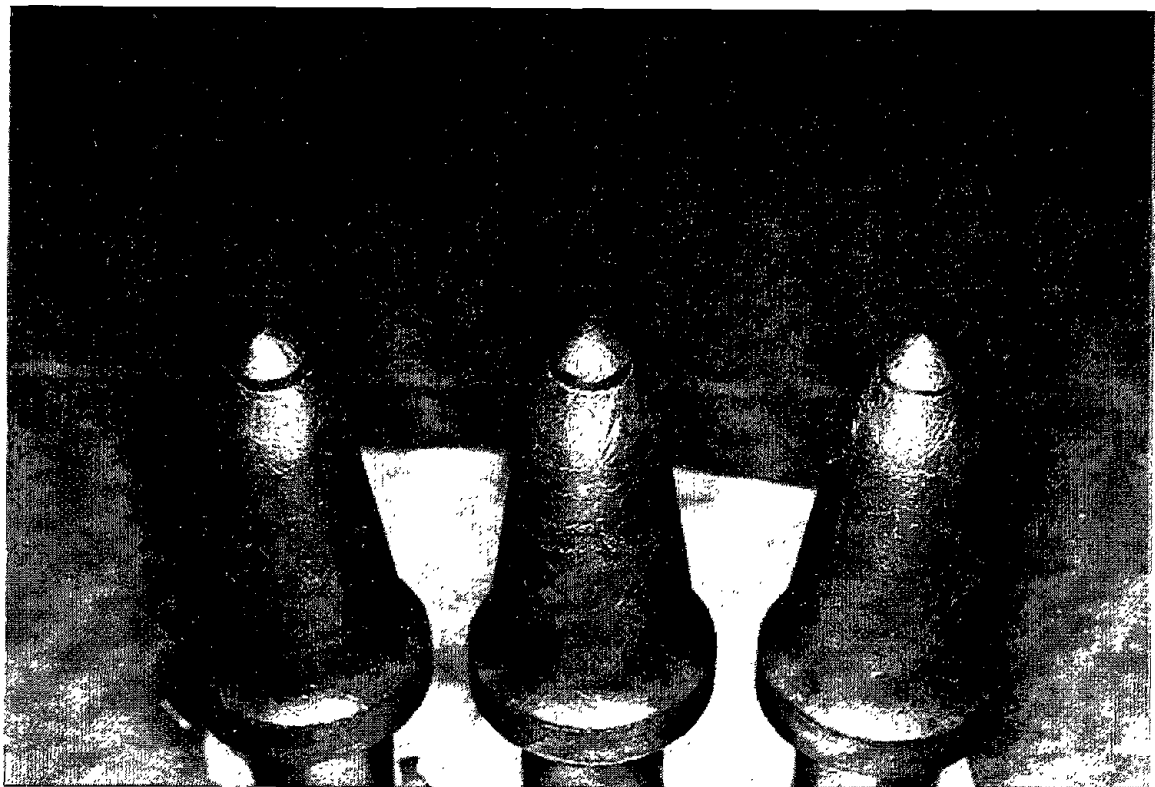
Sample bits from tailgate drum after low-pressure cutting, 34 rpm: E: endring; C: center of drum; G: gobside
